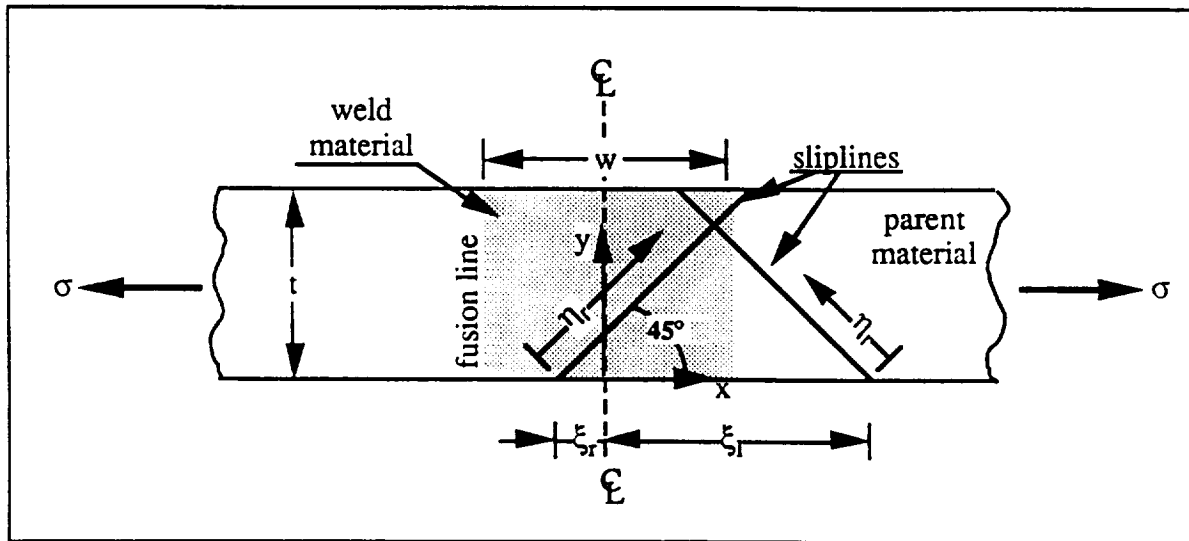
Uniform Weld Geometry Nomenclature
